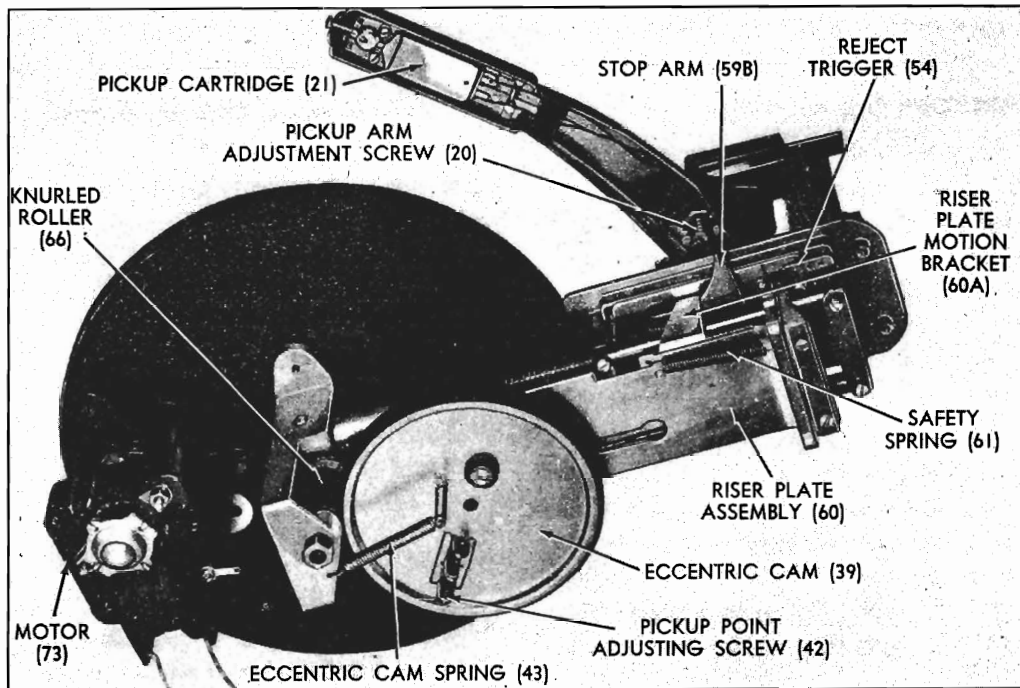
RECORD CHANGER, BOTTOM VIEW SHOWING LOCATION OF PARTS
